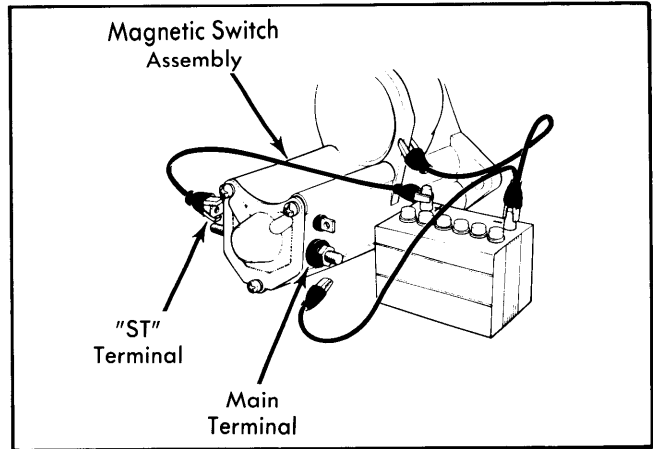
Magnetic Switch Hold-In Test Hook-Up
